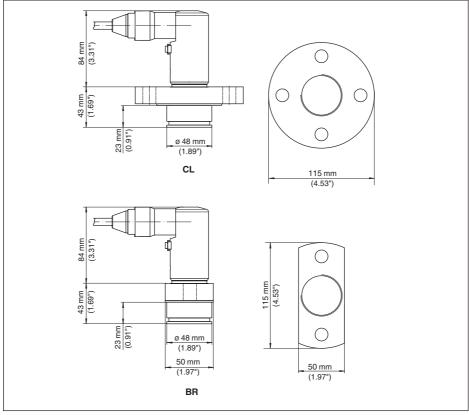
VEGABAR 82, flange connection for the paper industry: CL = absolutely front-flush for headbox, BR = absolutely front-flush for headbox (flange 2-times flattened)
